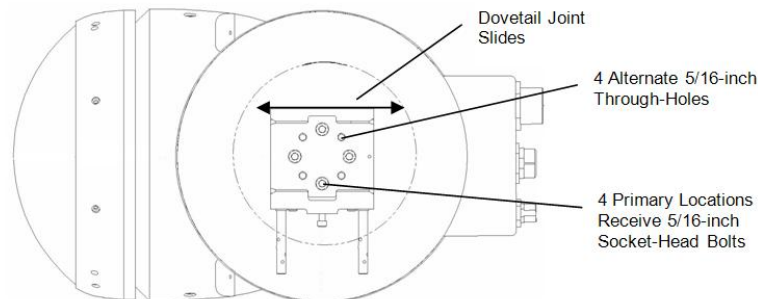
Top View of Gimbal Assembly with Spectrolab Dovetail Attachment
